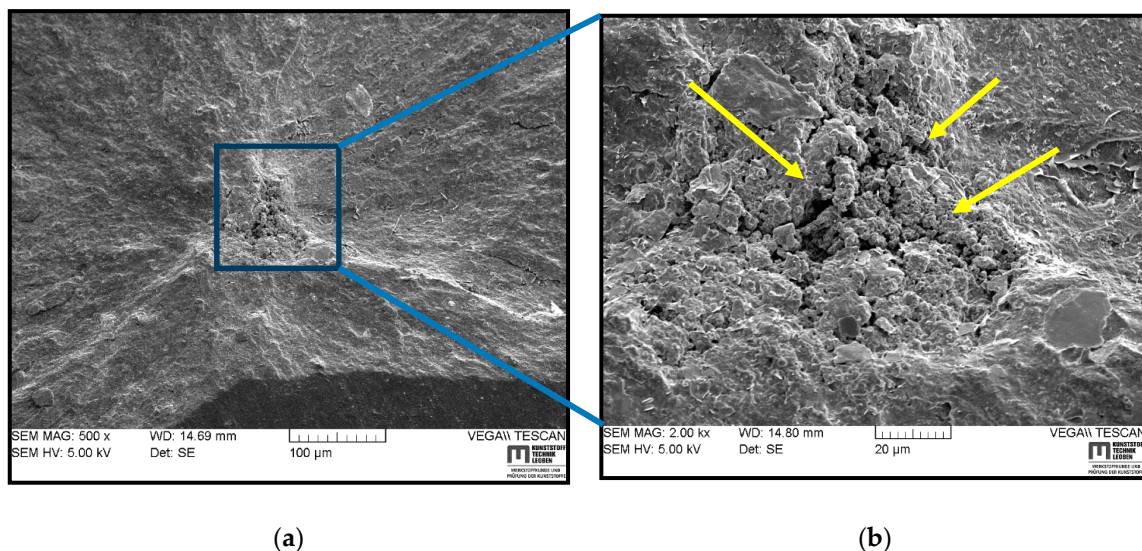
SEM images of a fracture surface starting from inherent voids of HNBR4 in different magnifications: (a) fracture initiation and propagation; (b) magnified view of fracture initiation and cracks into the material.
